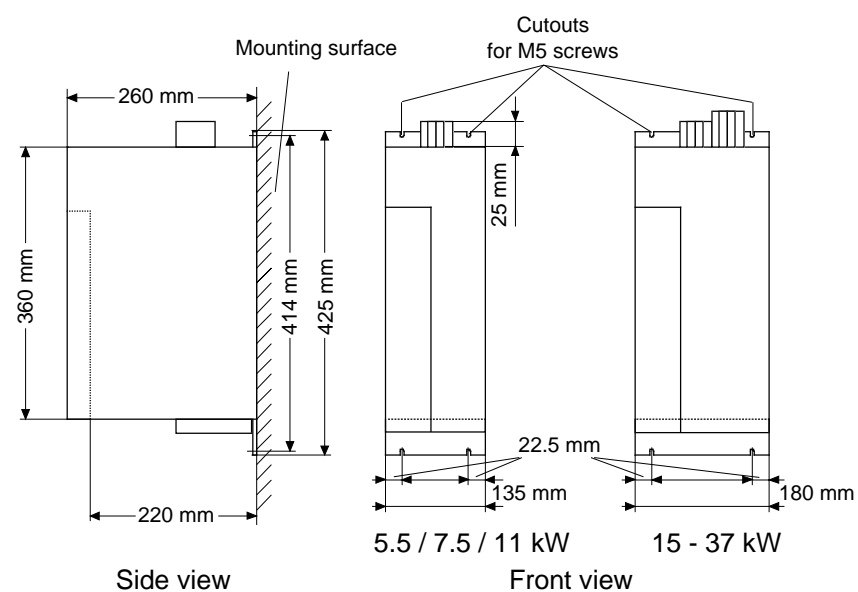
Dimension drawings for housings 135 mm and 180 mm wide
